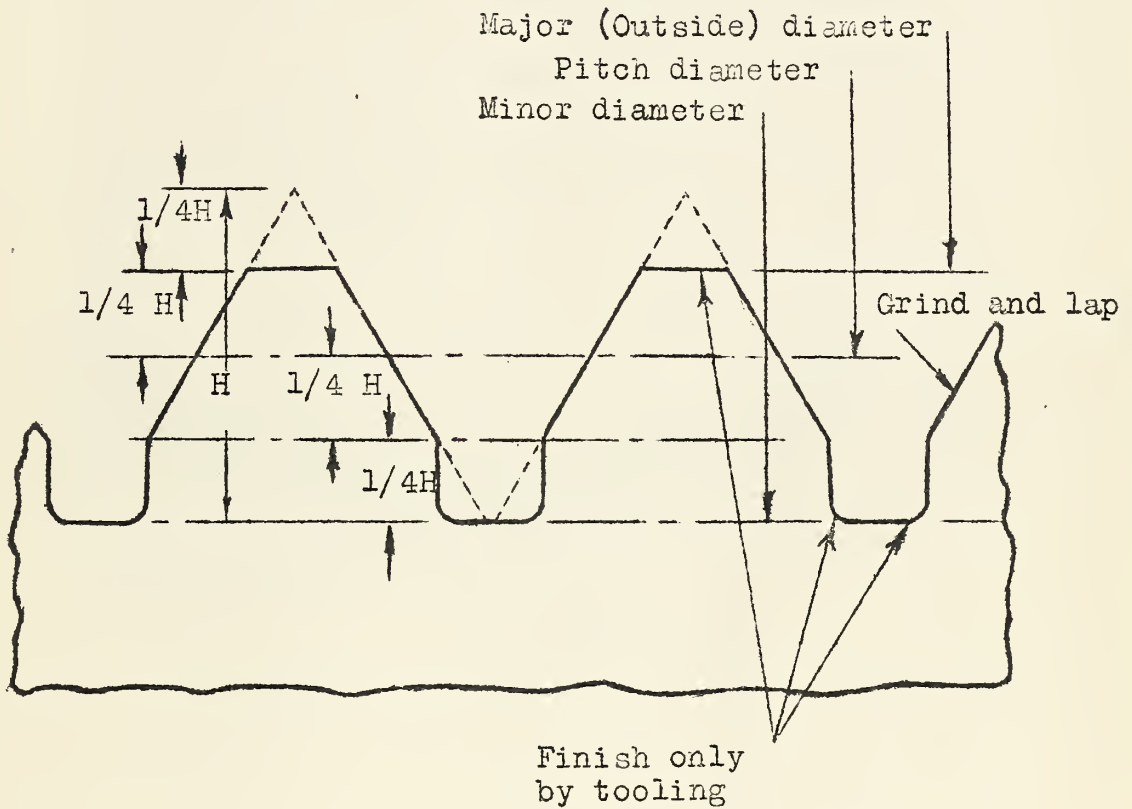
Recommended Thread Form of Check Plug for Checking Pitch Diameter of Threaded Ring Gage
